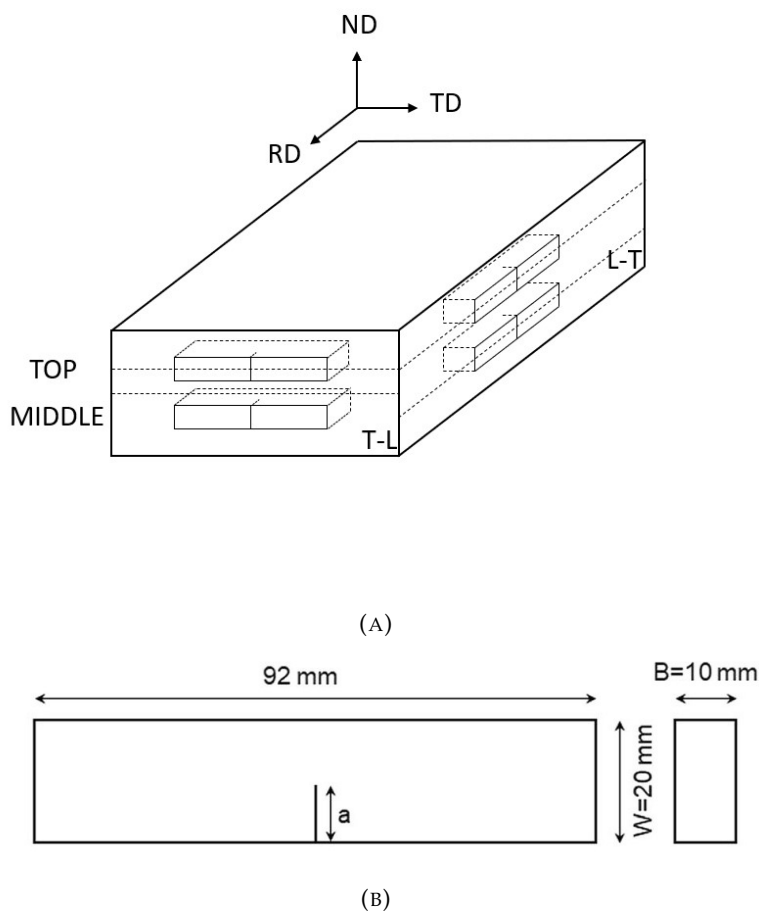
Schematic showing the orientations and dimensions of SENB specimens (A) Extraction of T-L and L-T specimens from the blocks (B) Dimensions of SENB specimen with notch length a [70]
